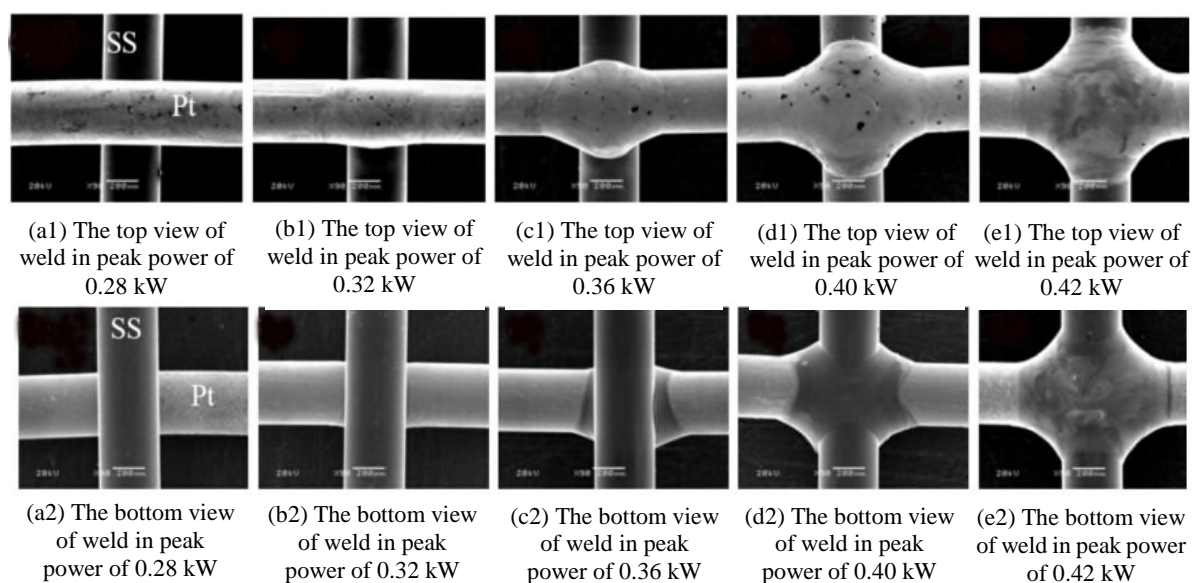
Top and bottom surfaces of welded crossed wire joints.
